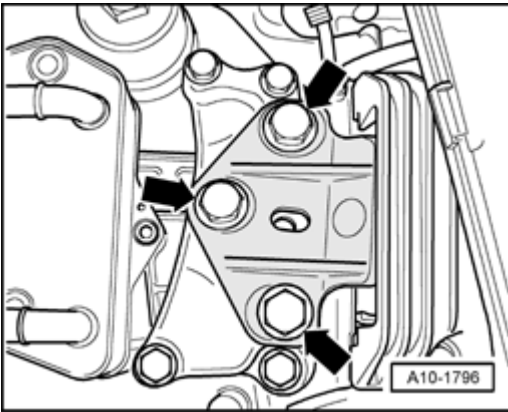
Locating Engine Carrier Bolts (Transmission Side)
